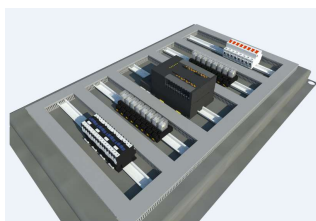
C. Inside Position Panel ISO Metrics View
